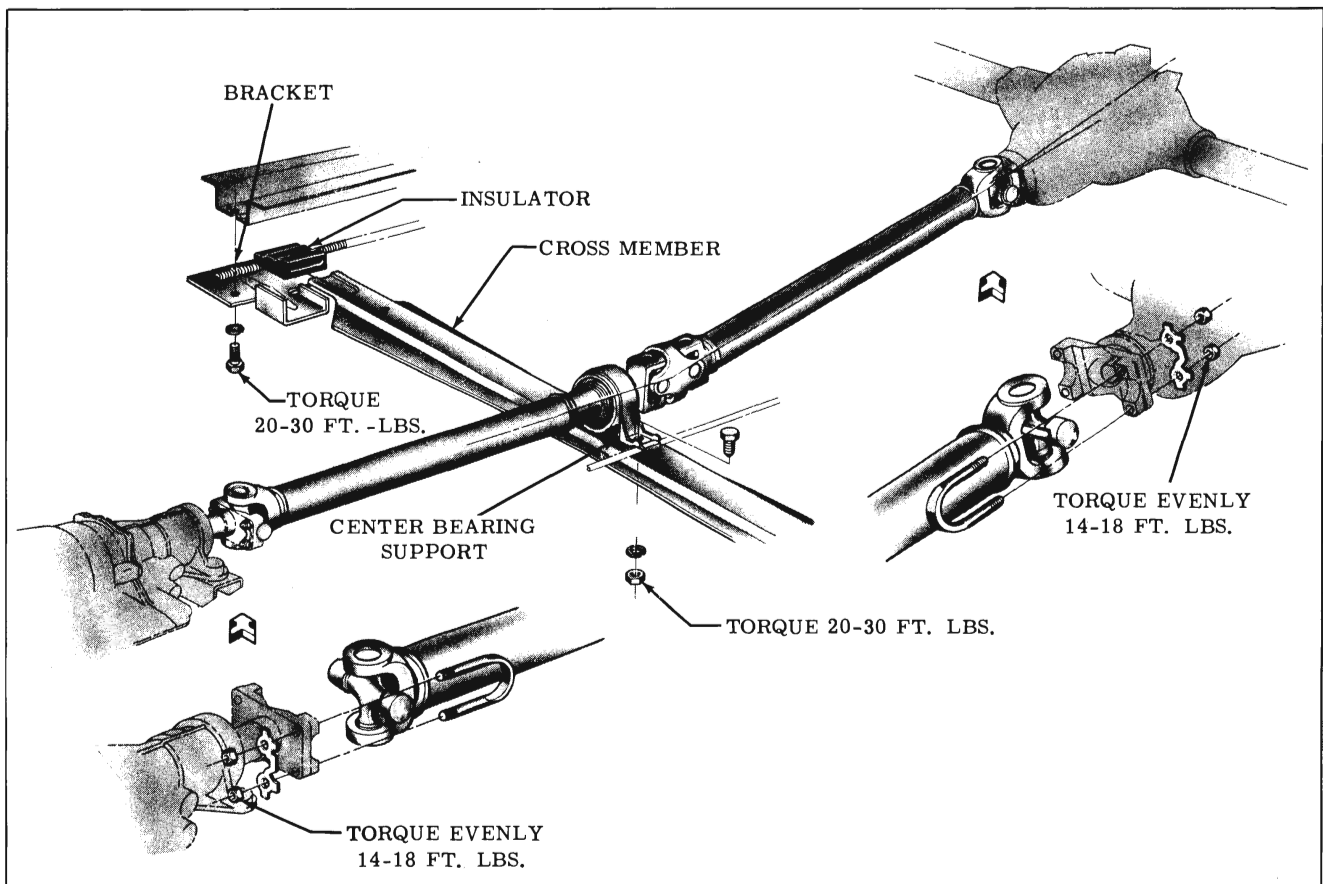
Propeller Shaft and Center Bearing Support Installation
